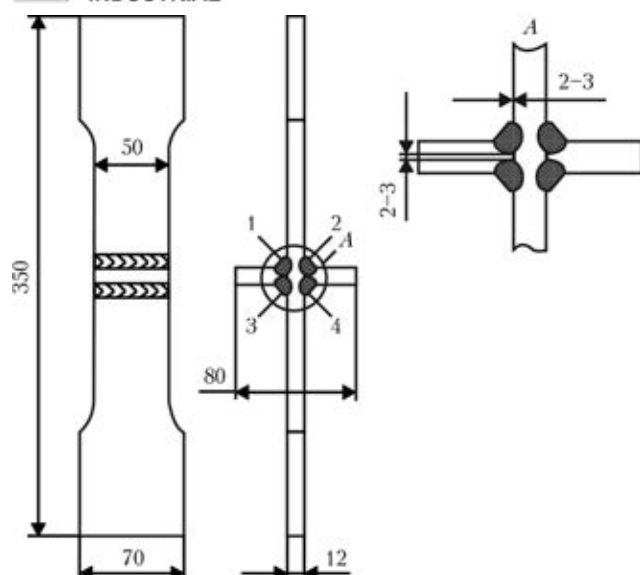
Shape and dimensions of specimens of T-joints from low-alloyed steels
